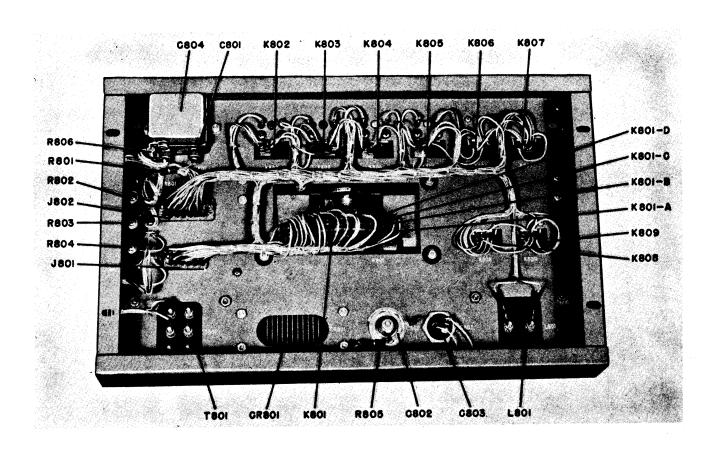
Dial Control Assembly, Bottom View, Location of Parts
